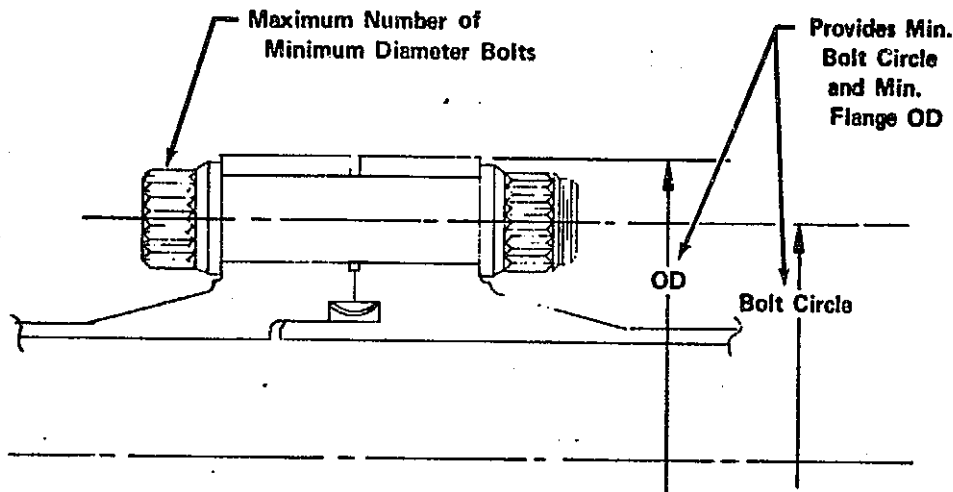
Raised Face Flange Provides Seal Integrity With Minimum Weight
